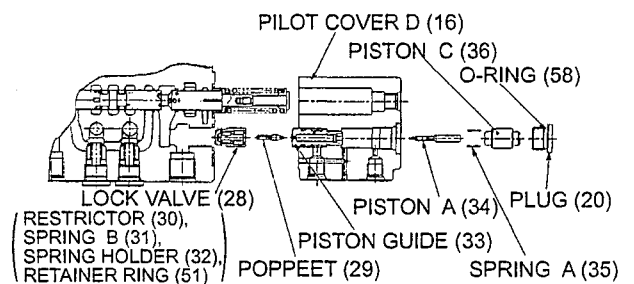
Disassembling lock valve pilot cover D (16)
